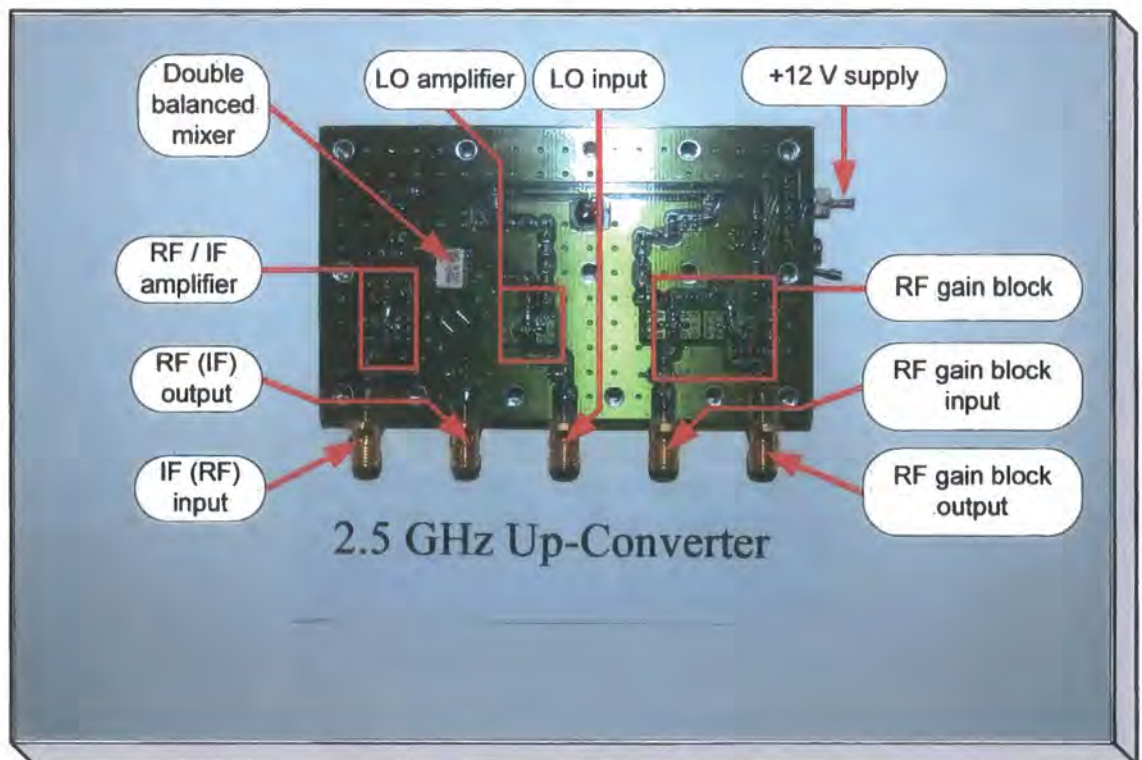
Photograph of the 2.5 GHz converter PCB
